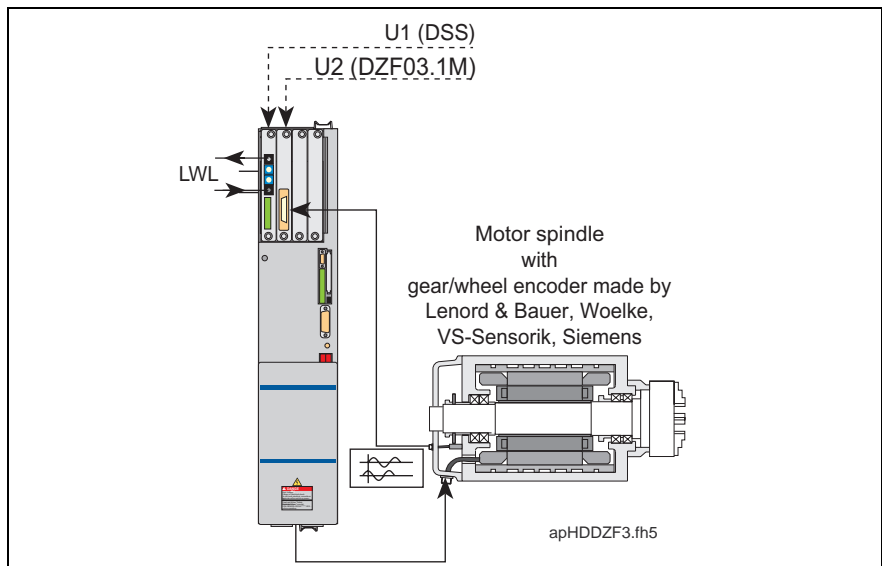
Motor spindle with above-referenced outside supplier encoder on a DZF3.1M plug-in module
